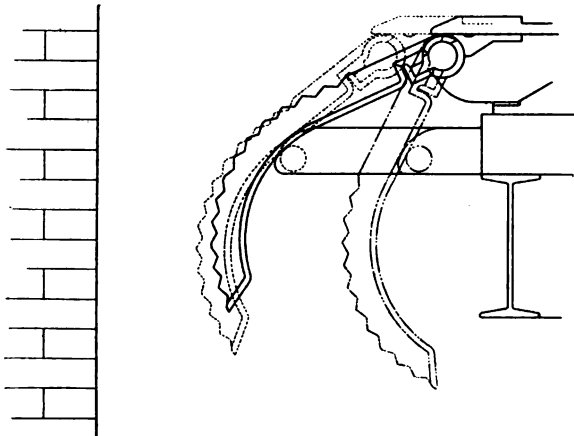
SANFORD RILEY COMPANY ROCKER DUMP PARTLY OPEN
